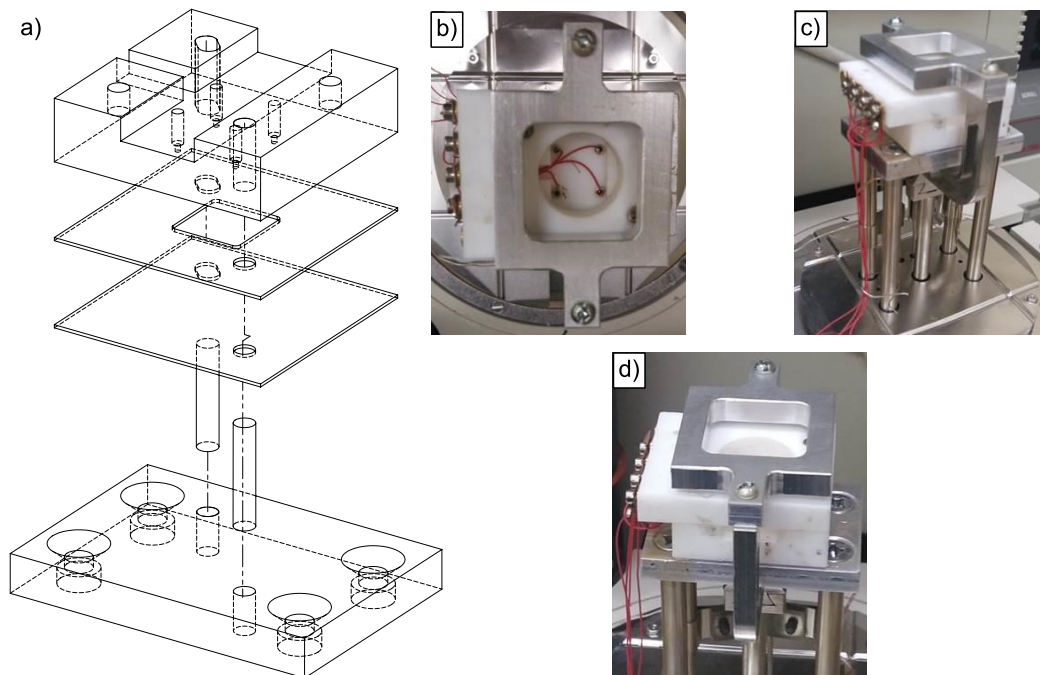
Diagram of designed probe. a) Exploded assembly view of designed probe-mold, b) top-view of assembled real device mounted in DMA, c) isometric view, d) side view.
